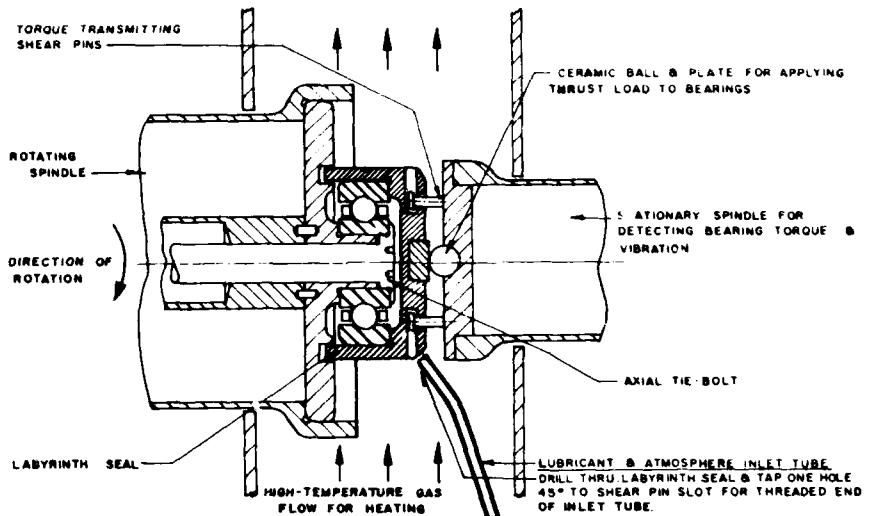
Machine used for evaluation of ceramic ball bearings at 1500 F
